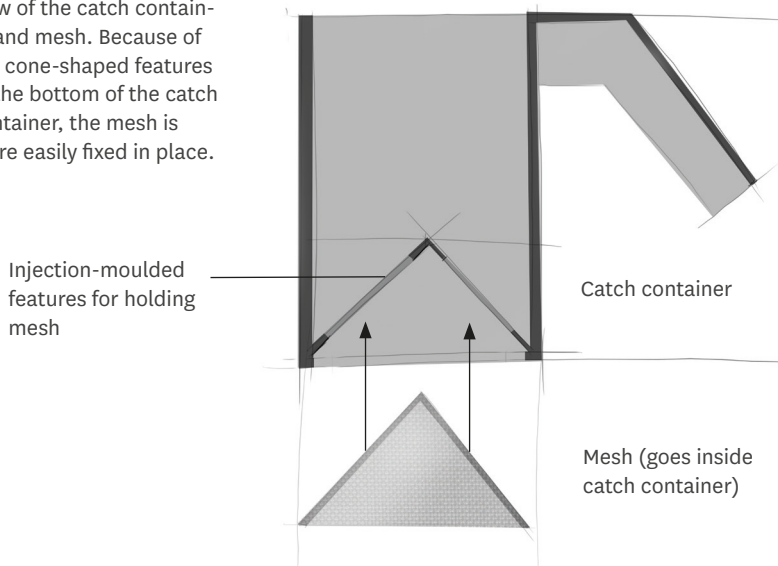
An exploded view of the catch container and mesh. Because of the cone-shaped features at the bottom of the catch container, the mesh is more easily fixed in place.
